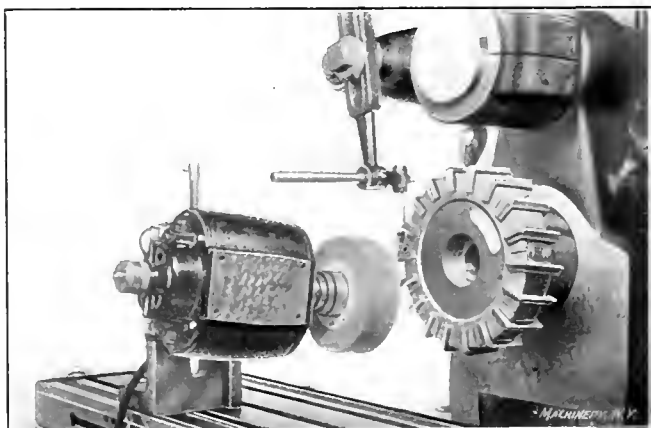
Sharpening the Face of a Heavy Face Mill in place on the Milling Machine.
